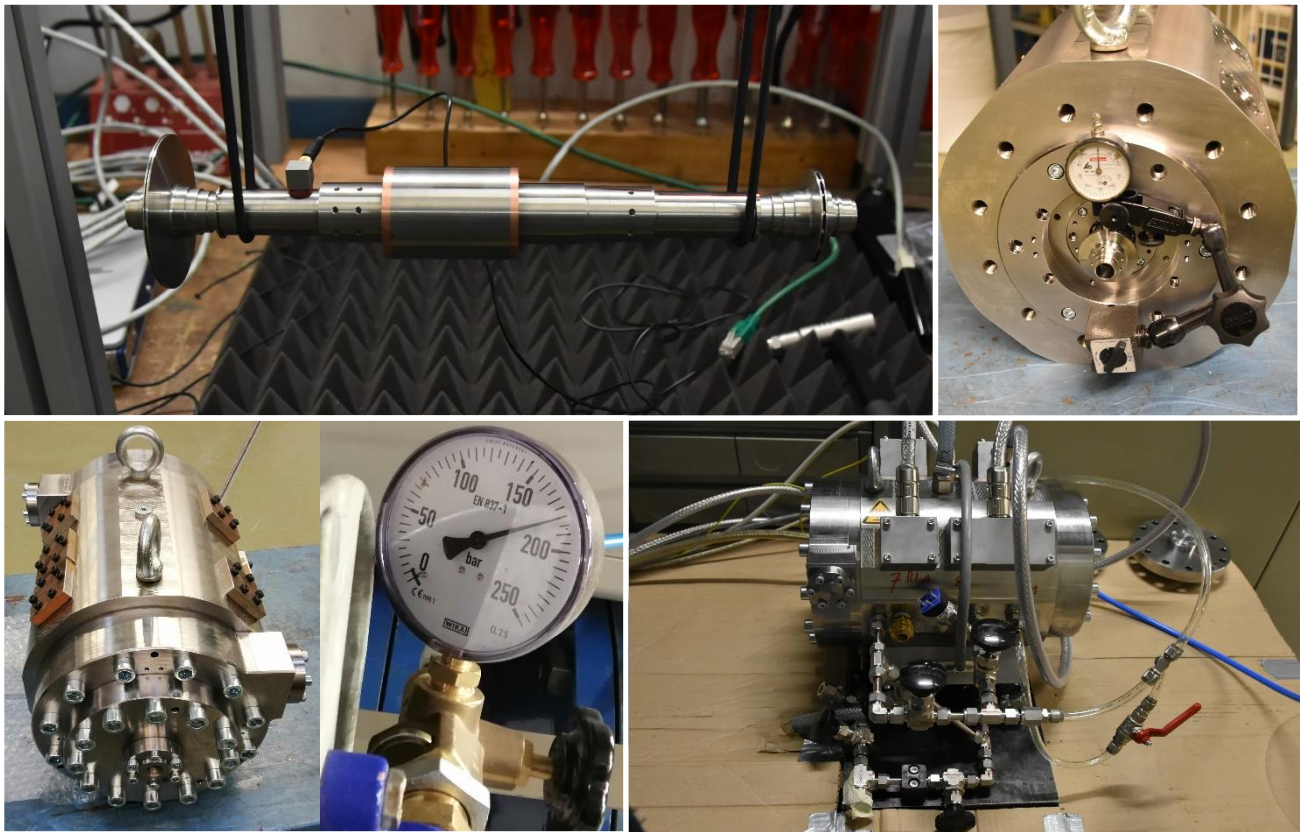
Test on turbomachine design and safety with validation of eigenfrequencies (top left), concentricity test (top right), pressure test at 180 bar (bottom left) and commissioning in air environment (bottom right)
